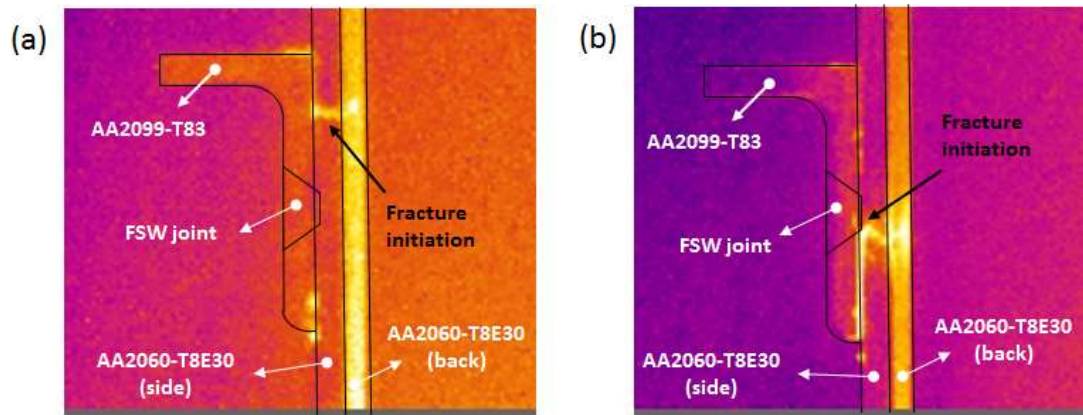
IR thermographic images showing the instant of the fracture in fatigue tests; (a) fracture out of the FSLW joint at high n° of cycles (specimen C05_A in Figure 76); and (b) fracture at the HAZ of the FSLW joint at low n° of cycles (specimen C05_B in Figure 76).
